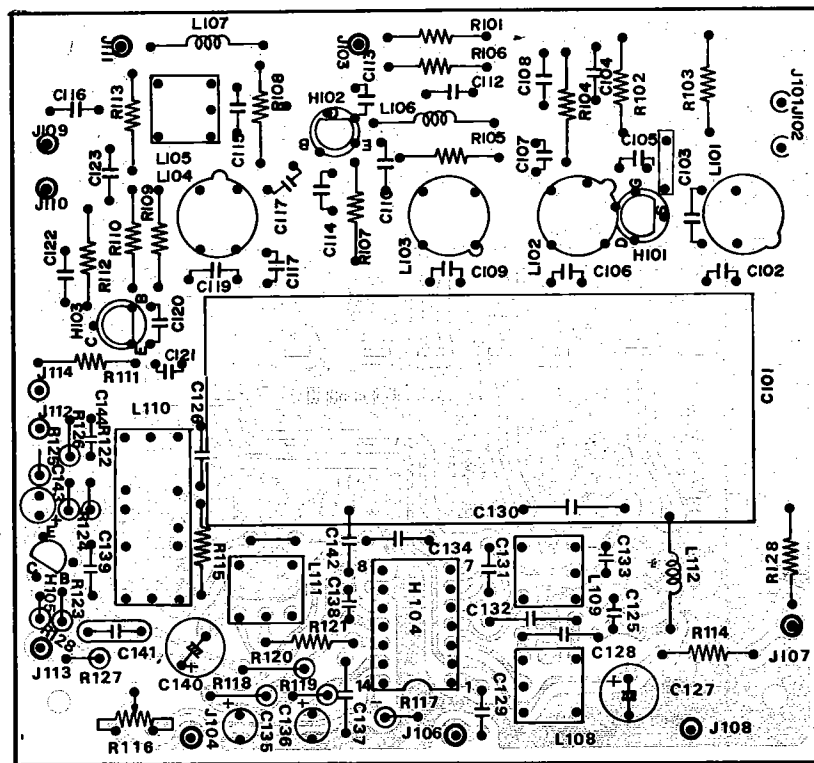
FM IF Amplifier, Detector, Muting Control and Meter Amplifier Unit Assembly P200 Component Locations
